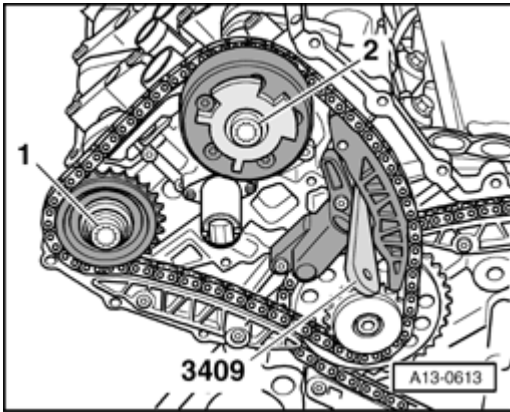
Tightening Camshaft Bolt On Exhaust Camshaft Of Left Cylinder Head To Initial Tightening Torque
